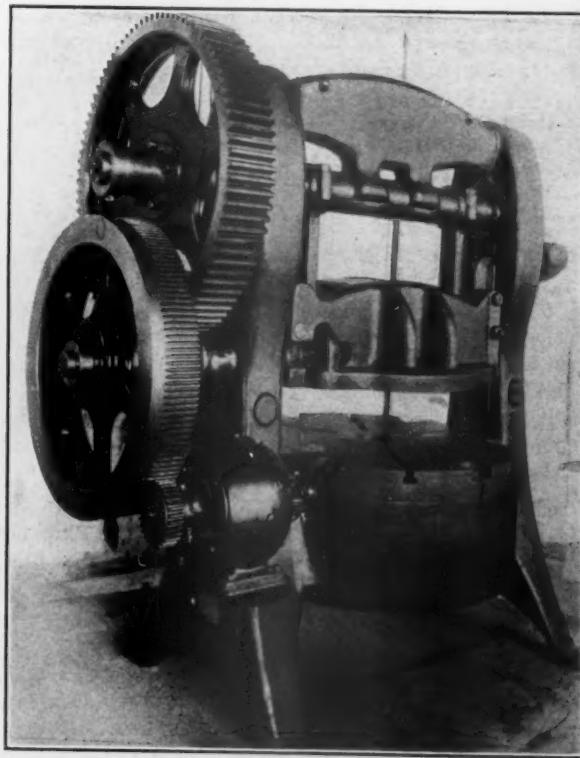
CONSTANT SPEED DRIVE FOR A HEAVY FERRACUTE PUNCH PRESS.—NORTHERN ELECTRIC MFG. CO. MOTOR.
